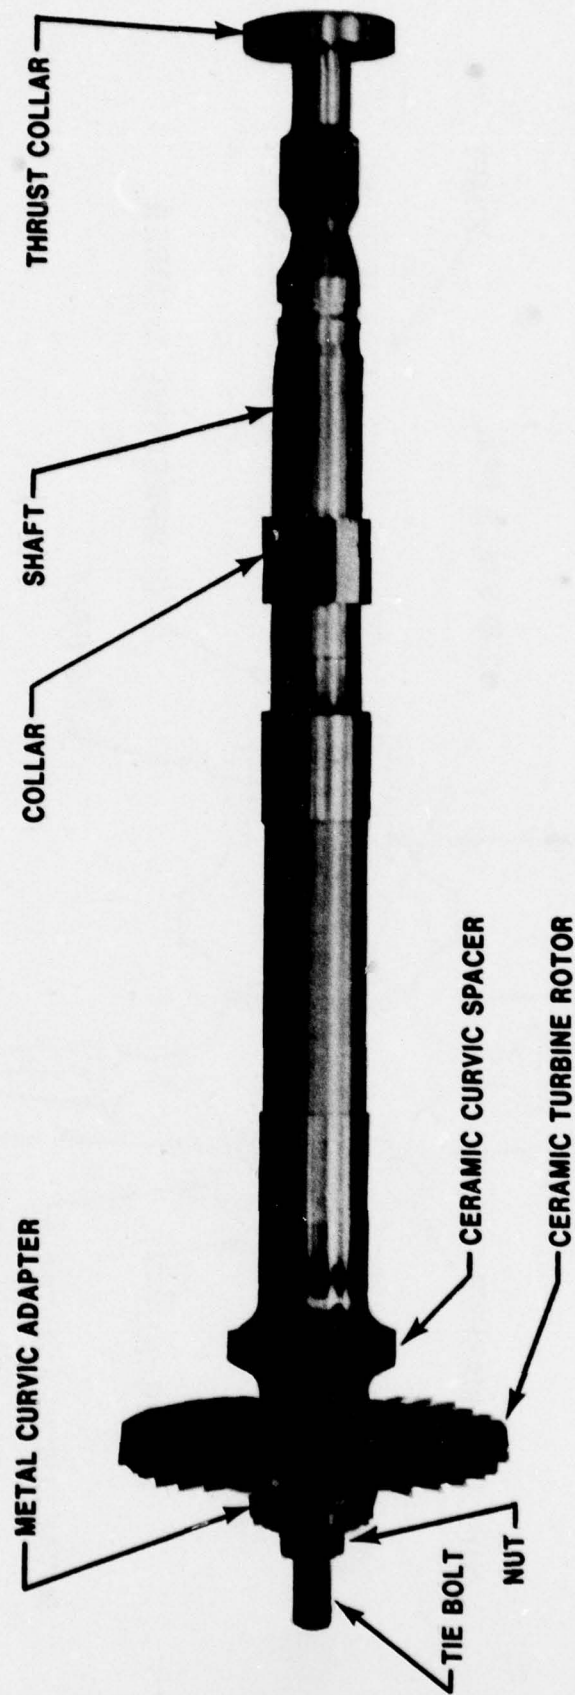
Turbine Rotor and Shaft Assembly.
